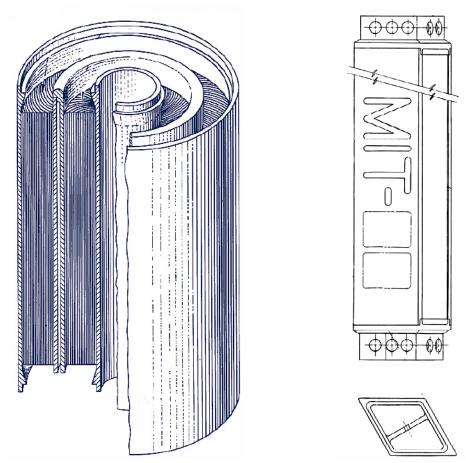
HFIR (LEFT) AND MIT FUEL SUBASSEMBLIES
